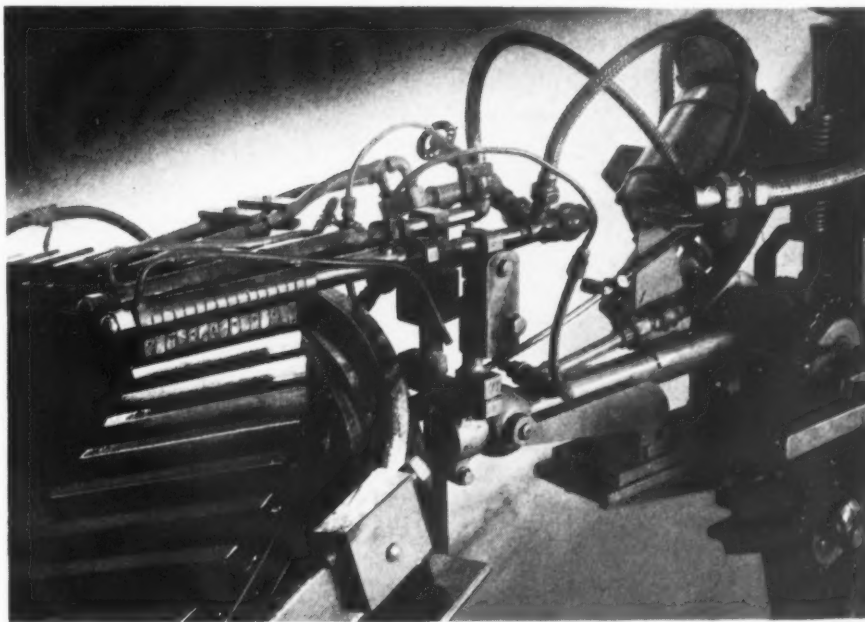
Close-up View of Torches, Quenching Nozzles, and Timing Mechanism Provided on the Flame-hardening Machine Shown in Fig. 5
